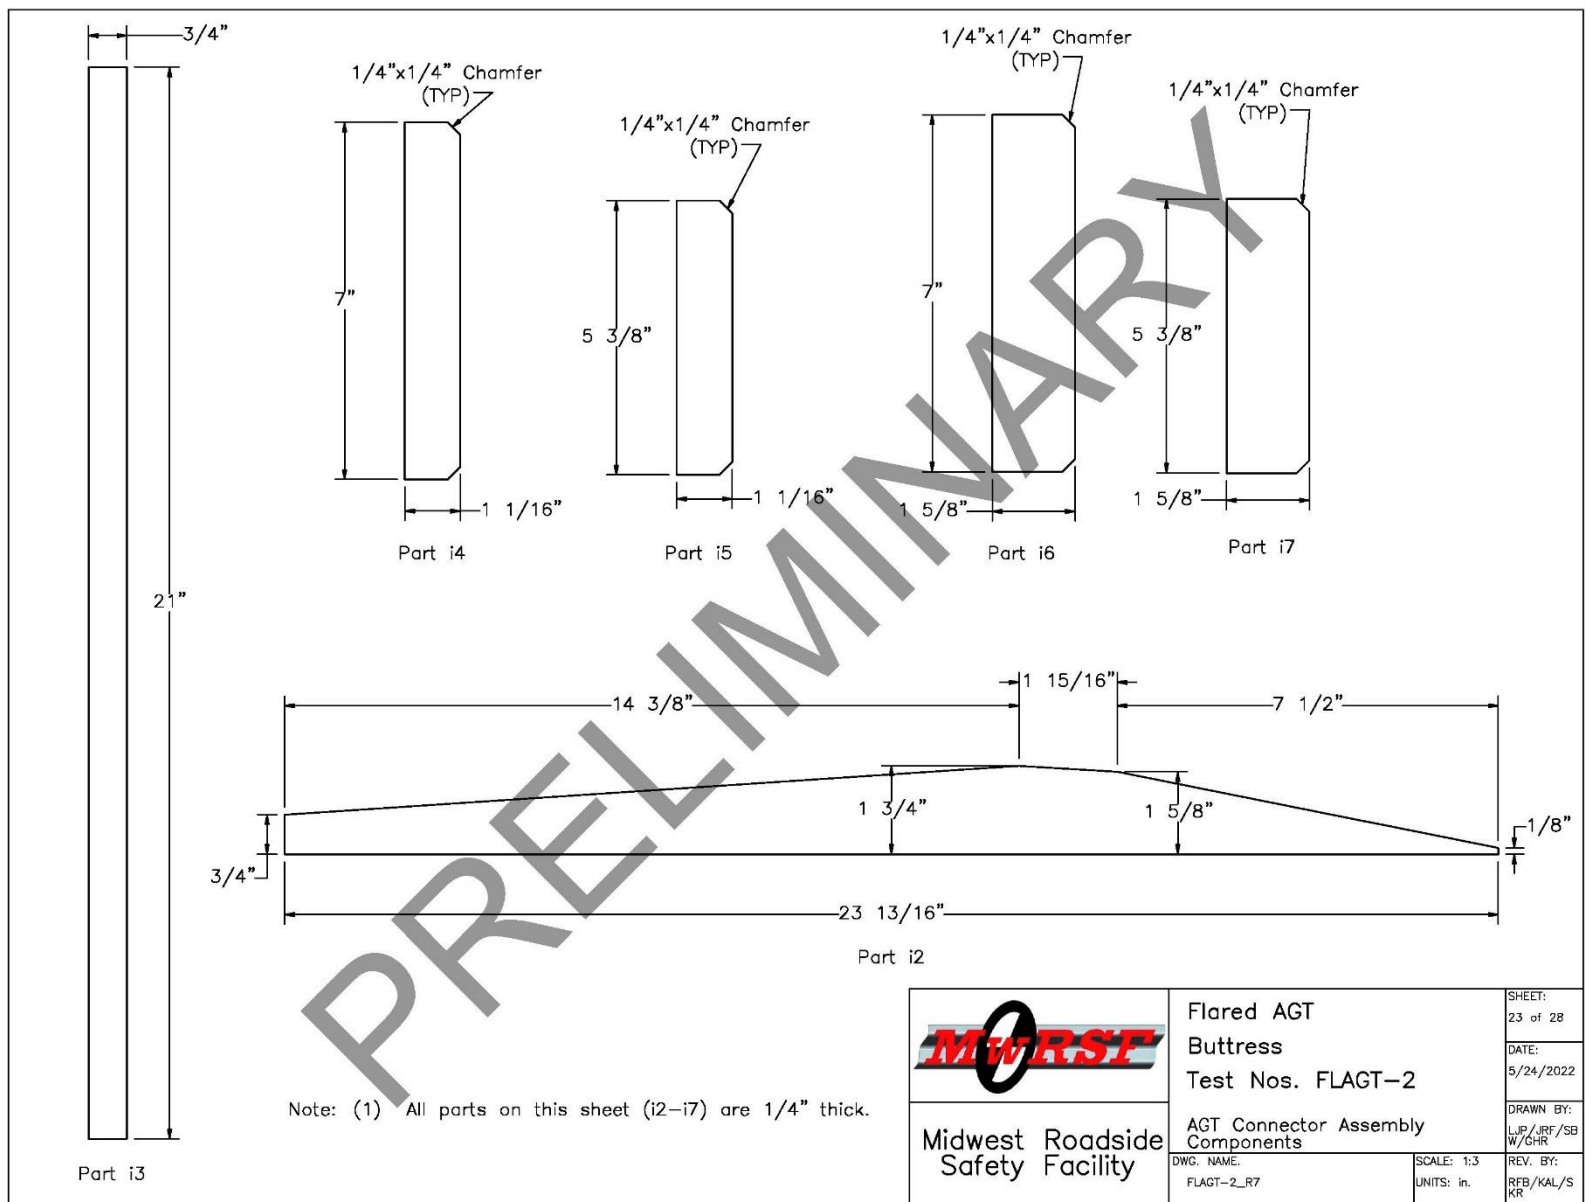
AGT Connector Assembly Components, Test No. FLAGT-2
